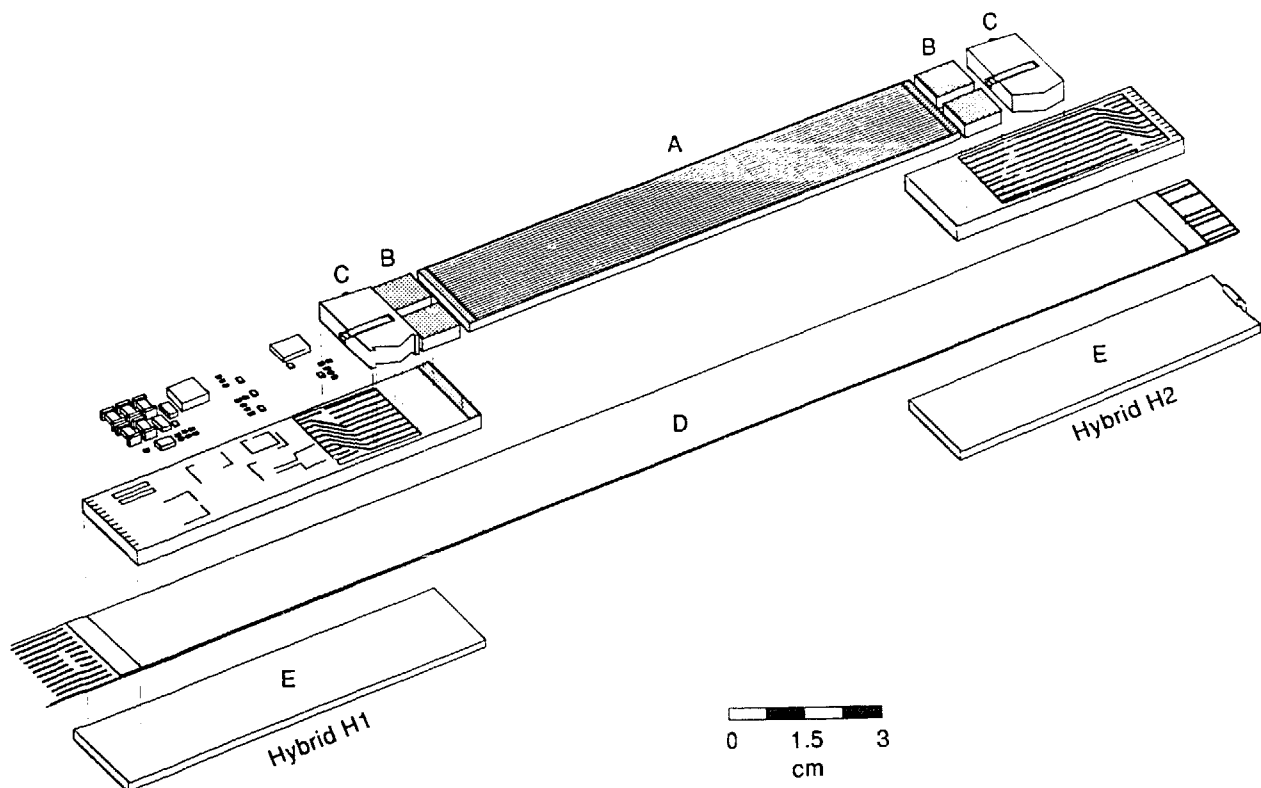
Exploded view of a detector module showing the elements of the hybrids H1 and H2: A - silicon strip detector, B - Microplex readout chips, C - spring blocks, D - thin cable, and E - steel supports.
